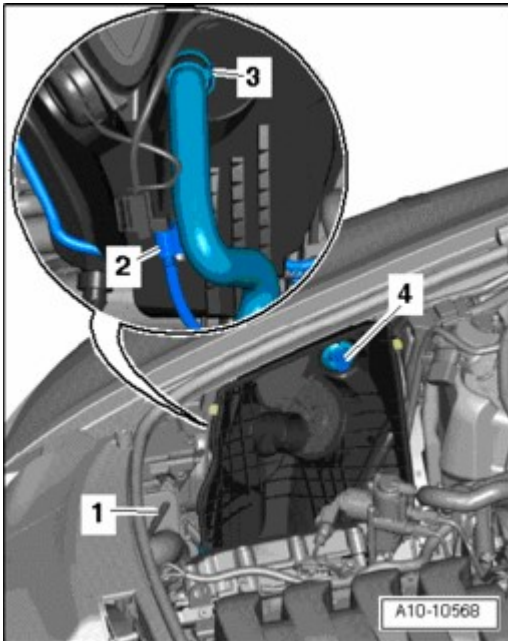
Identifying Vacuum Line, Spreader Clips, Intake Air Switch-Over Valve N335 Electrical Connection & Air Guide Hose
